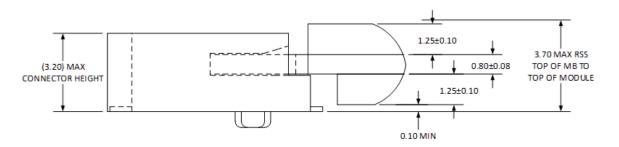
H3.2-D2 - Stack-up Top Mount Double-sided Module for 1.35 Maximum Top-side Component Height
